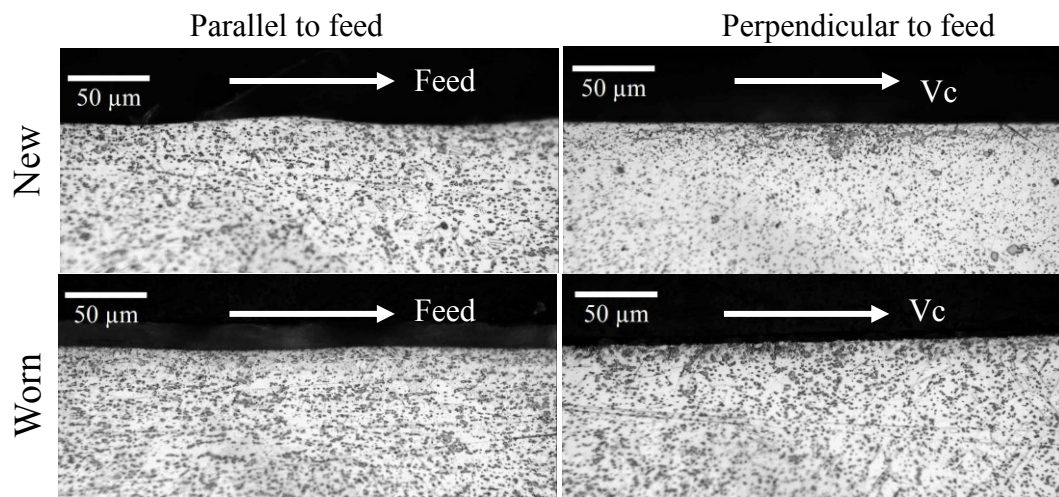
Cross sectional optical micrographs of machined workpiece sub-surface of Test 1 following machining with new and worn tools
